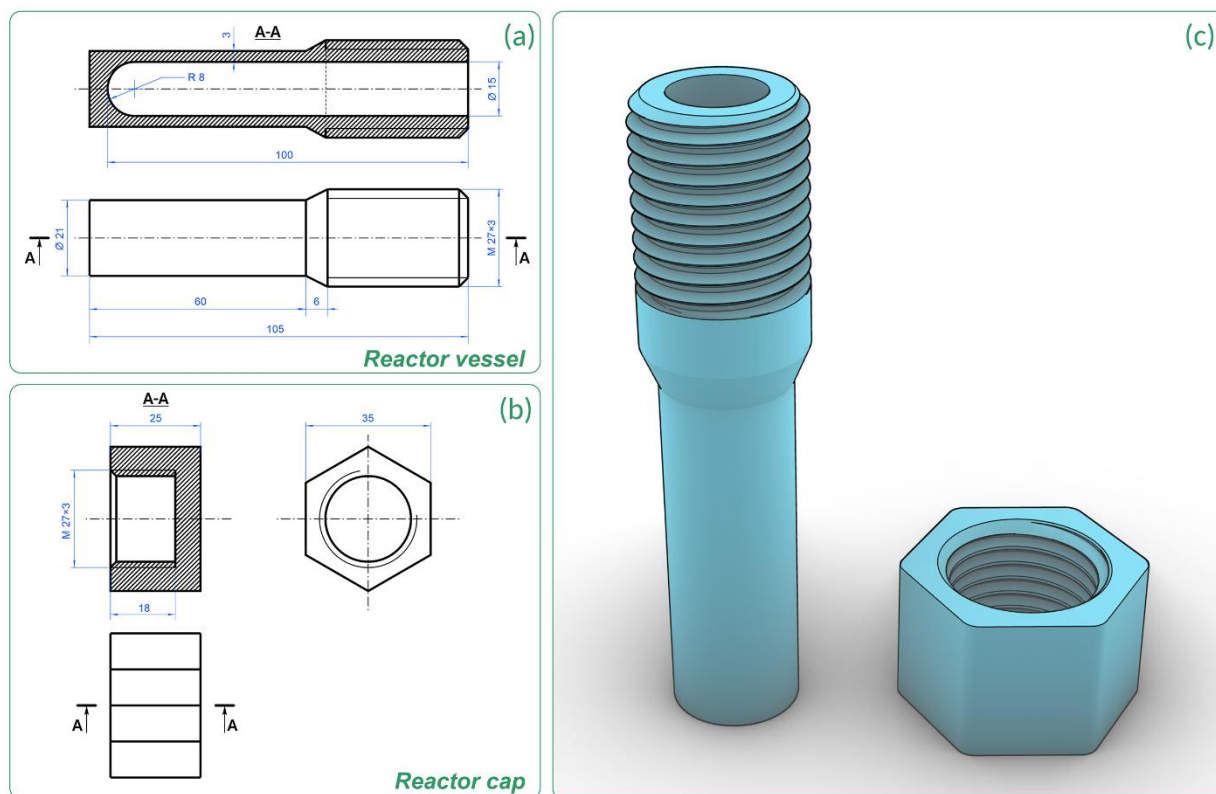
(a) Drawing of the I-tube type 2 reactor vessel; (b) reactor cap drawing; (c) general view of the I-tube type 3 reactor model.
